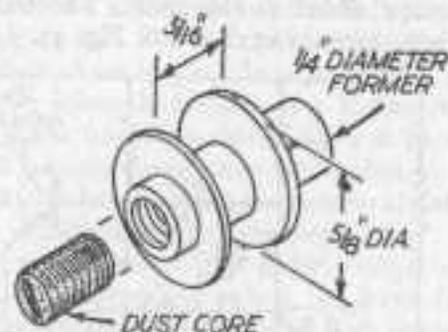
PREPARING THE COIL FORMER FOR WINDING THE CHOKE COILS.
